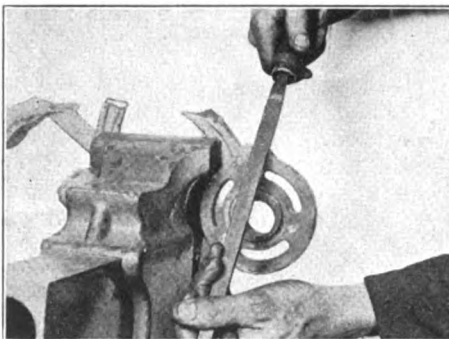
THE CASTING MUST BE THOROUGHLY CLEANED
